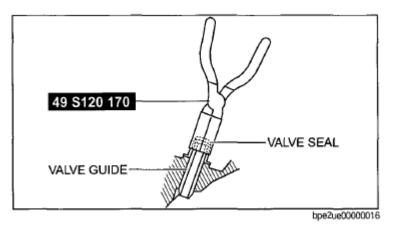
Removing Valve Seal From Valve Guide Using Pliers
